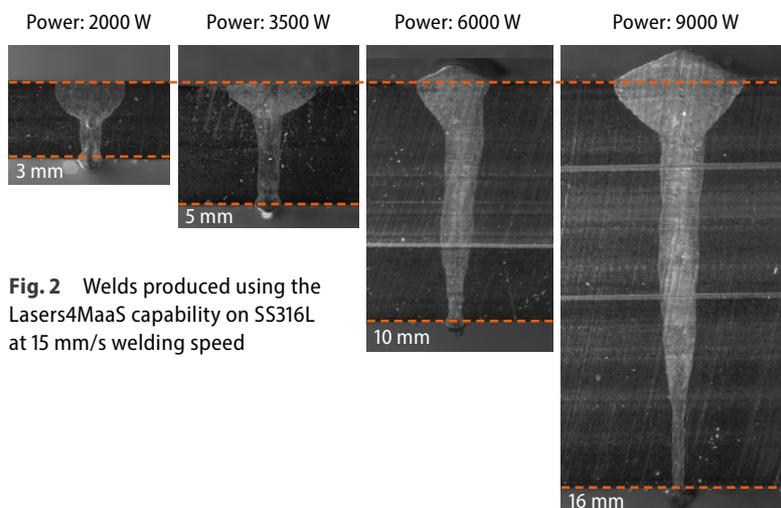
Welds produced using the Lasers4MaaS capability on SS316L at 15 mm/s welding speed
